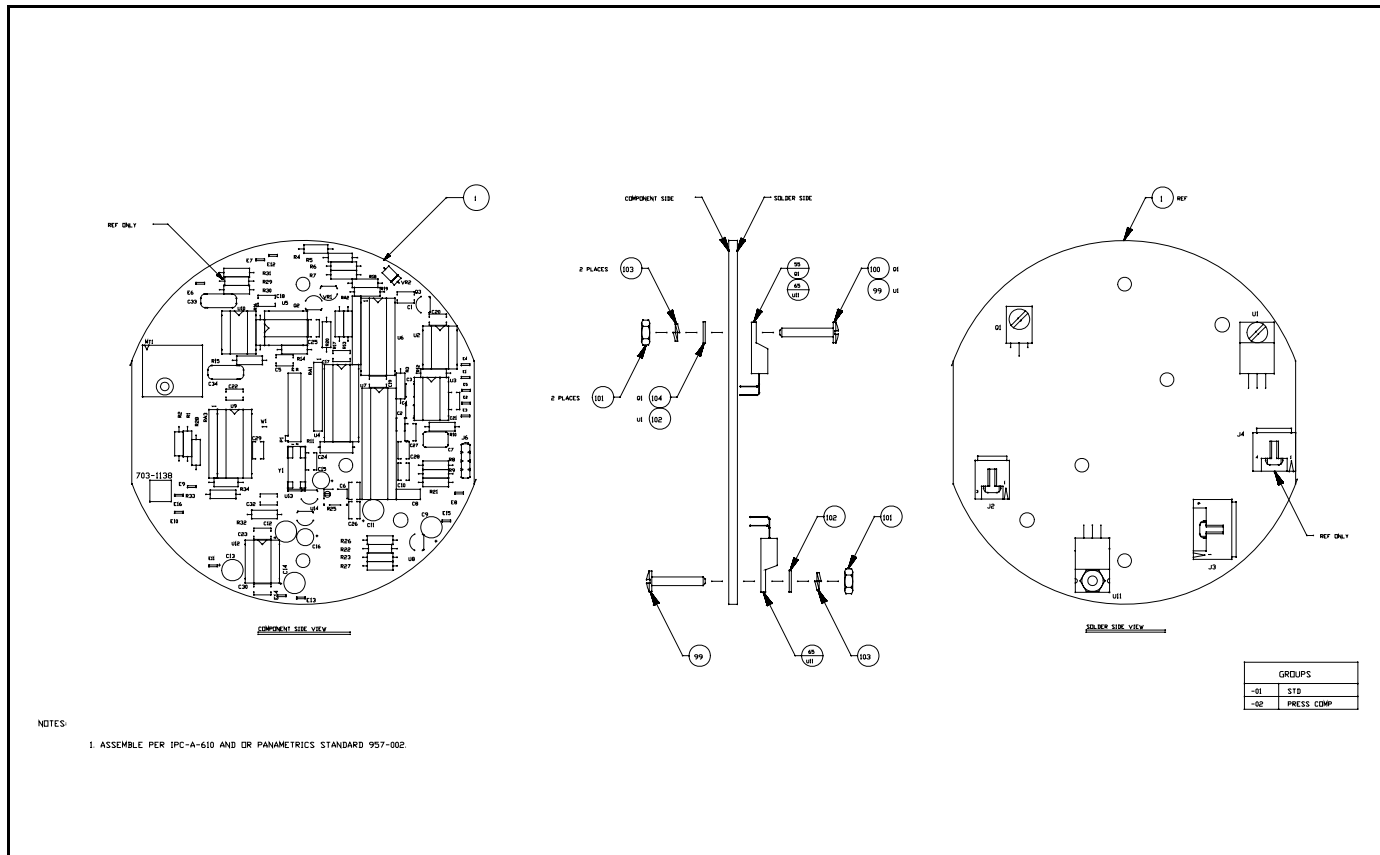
Digital PCB Schematic (ref. dwg #700-1139, sht 2)
